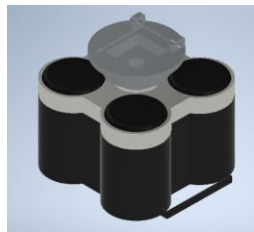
Assembly View of the Solar-Powered Mosquito Killer Device.
